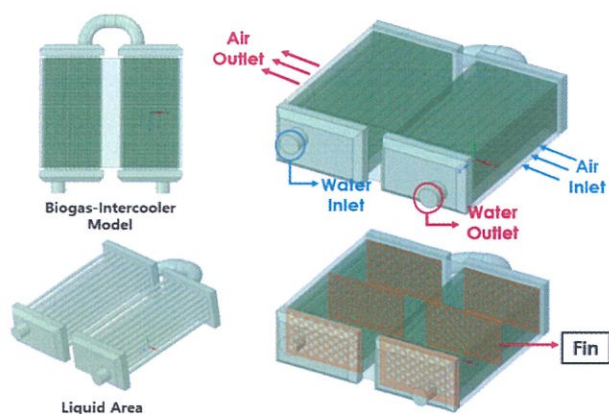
3D Layout of the Intercooler for Biogas Generator
